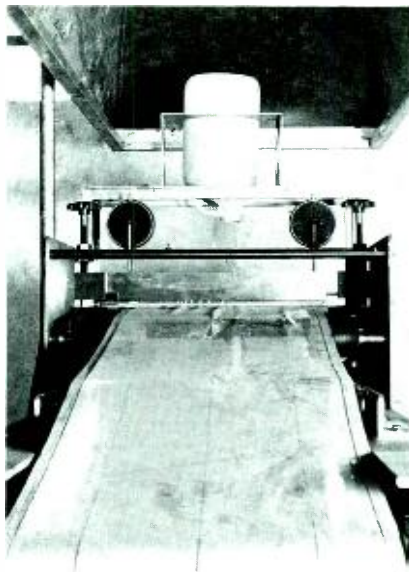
"Doctor blade" technique used in the formation of precisely controlled thermoplastic sheets.
